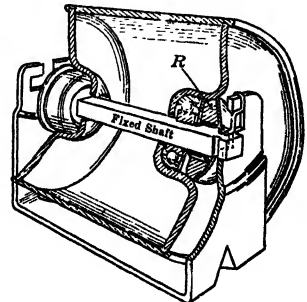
Stephens-Adamson Ball-bearing Pulley.
